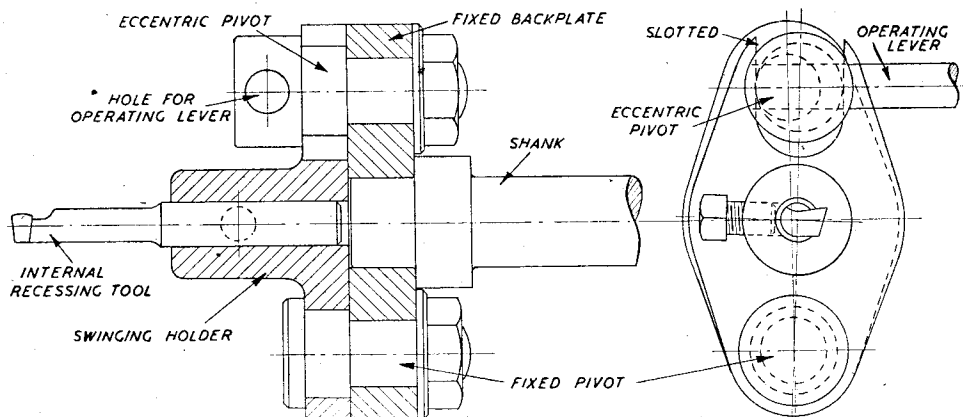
A boring tool holder with side swing movement, for internal recessing or chamfering operations.
